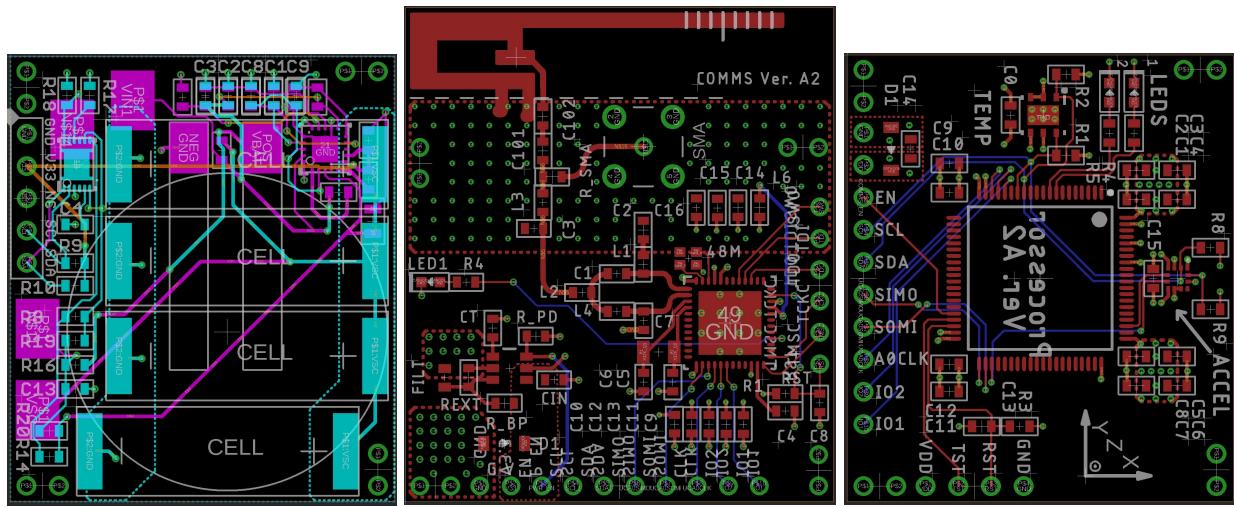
Prototype 3 PCB Board Design (left to right: power, comms, sensor)
